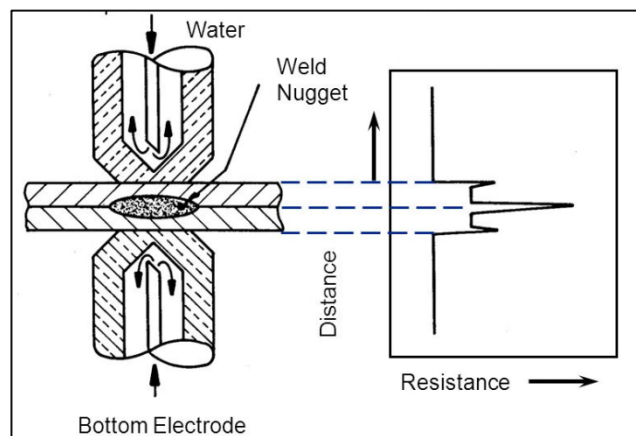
The Resistance obtained during resistance spot welding operation
